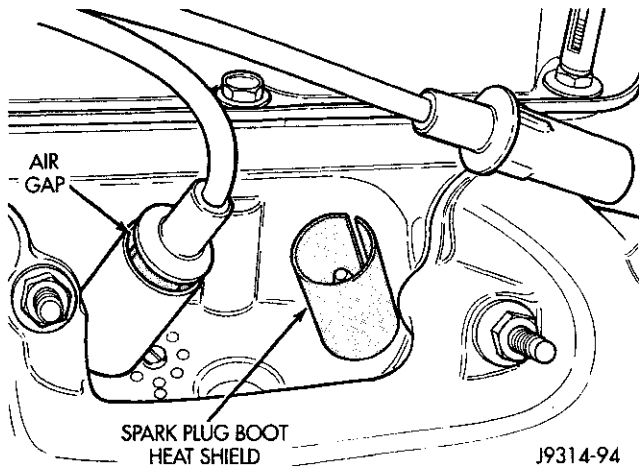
Heat Shields—3.9L/5.2L/5.9L Engines
